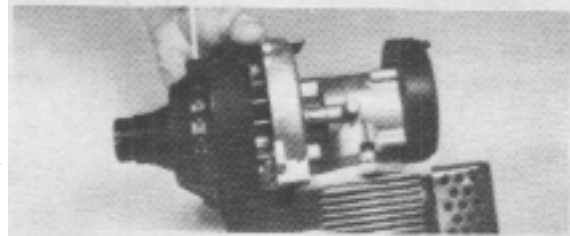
Pull slowly on starter rope to engage starter dogs, then install the starter housing mounting screws (ref. Fig. 1).
